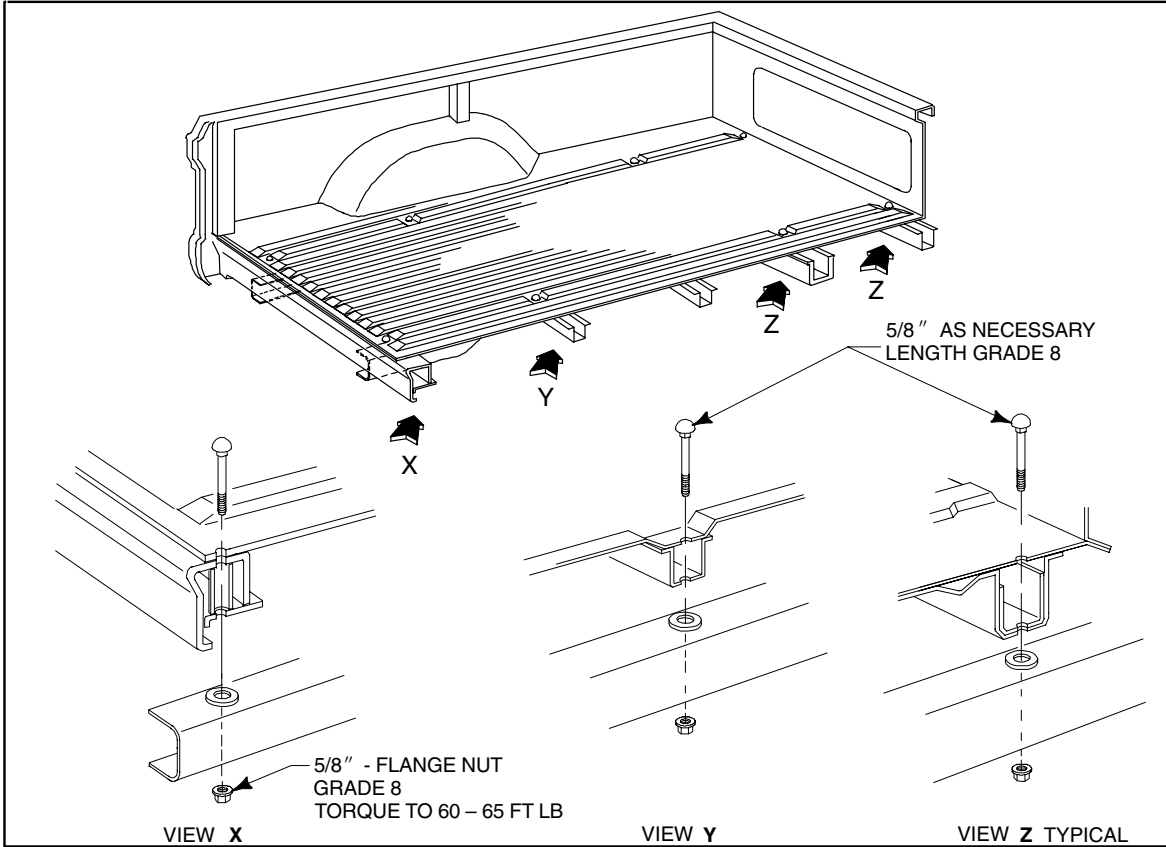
FIGURE C - SUPER DUTY F-SERIES SUB MOUNTING TECHNIQUE #3
